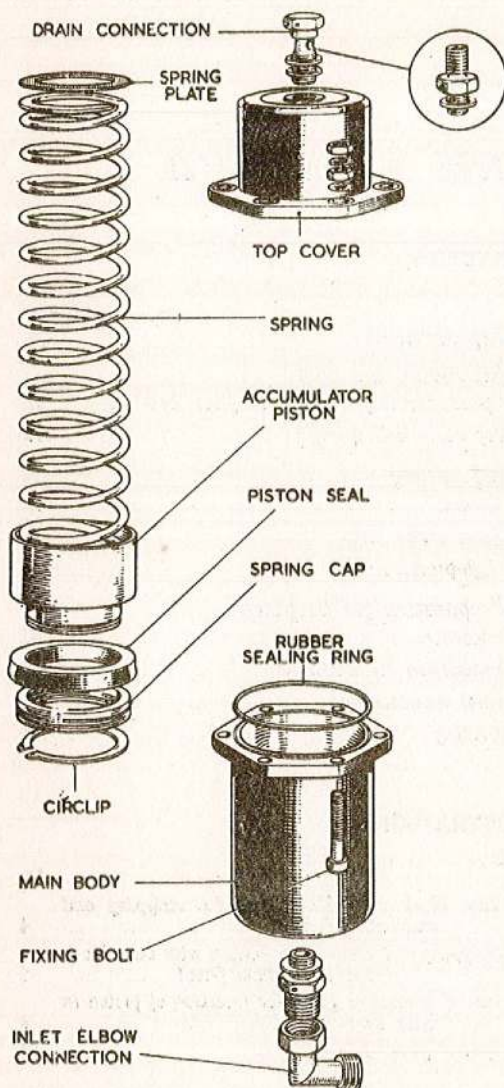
Dismantled view of accumulator units, Type A2/1A and A2/2A. (The type A2/2A unit has straight unions, the upper one is shown inset, and the inset elbow is omitted)
